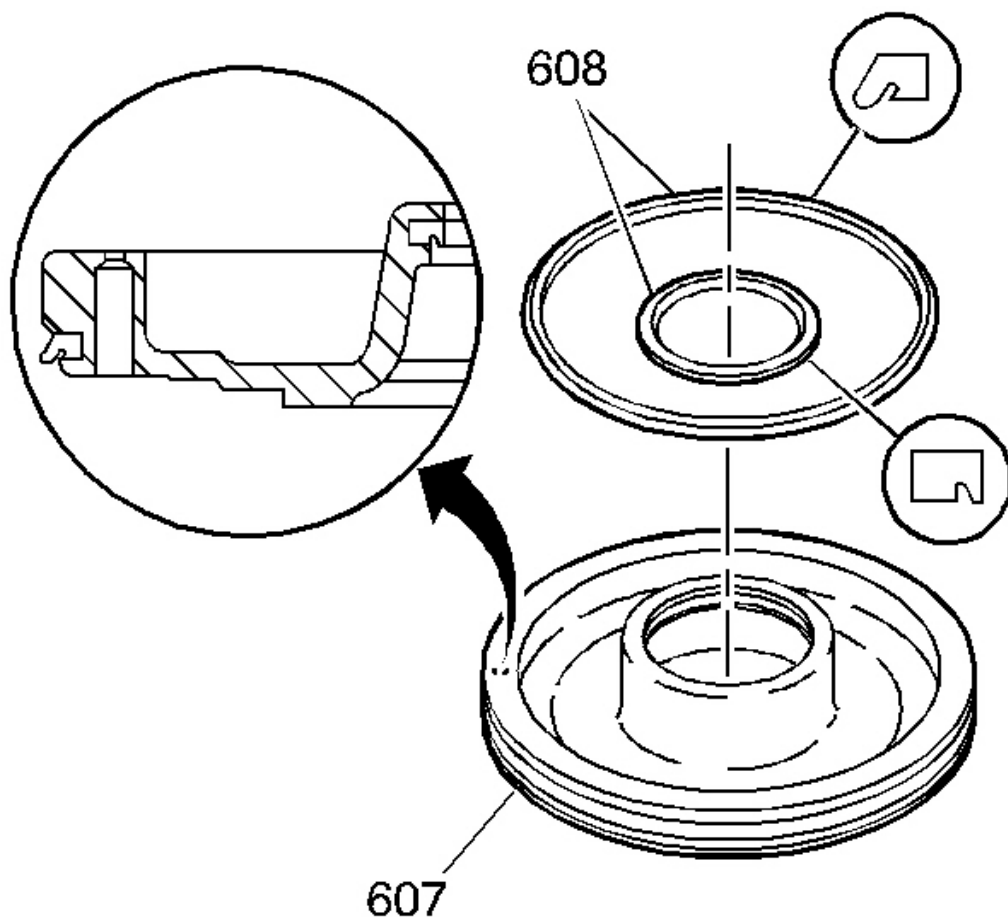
Locating Inspection Areas On Reverse Input Clutch Piston
